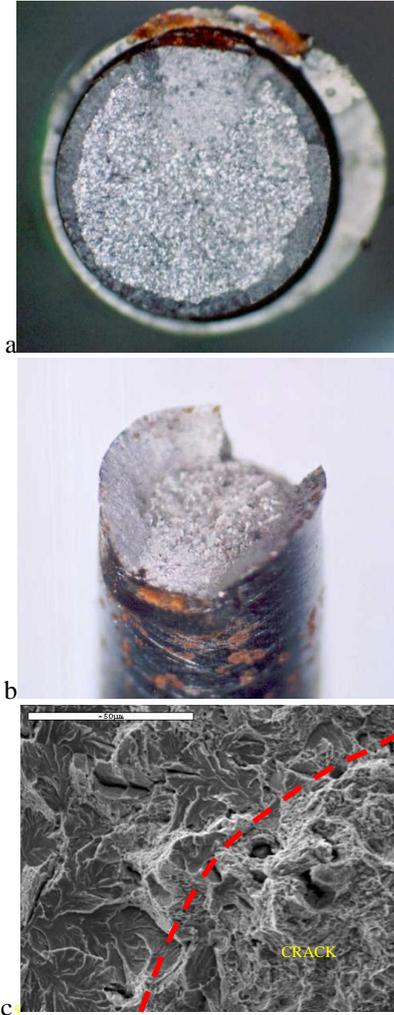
Surface of fracture: a) modified parent pearlitic steel, b) cold drawn steel and c) Crack tip.
